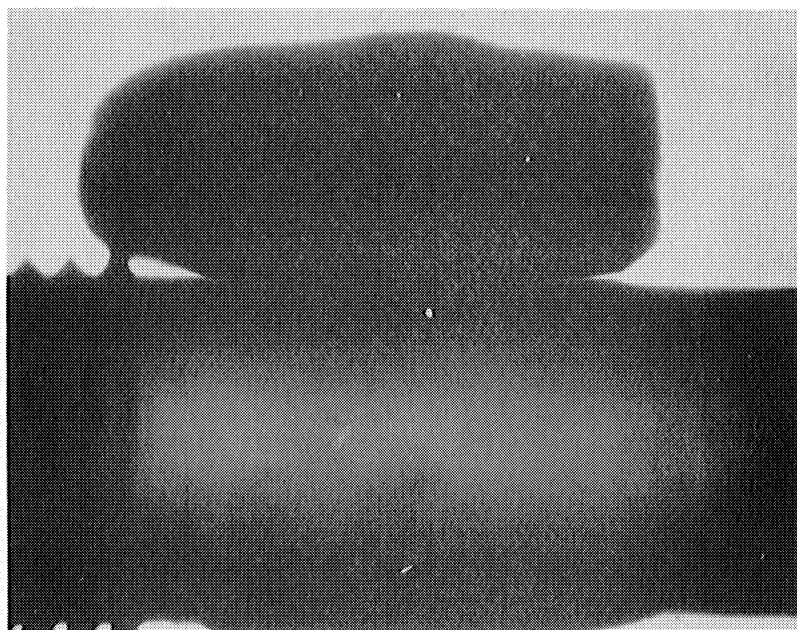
X-ray of Weld in Upper Body -
